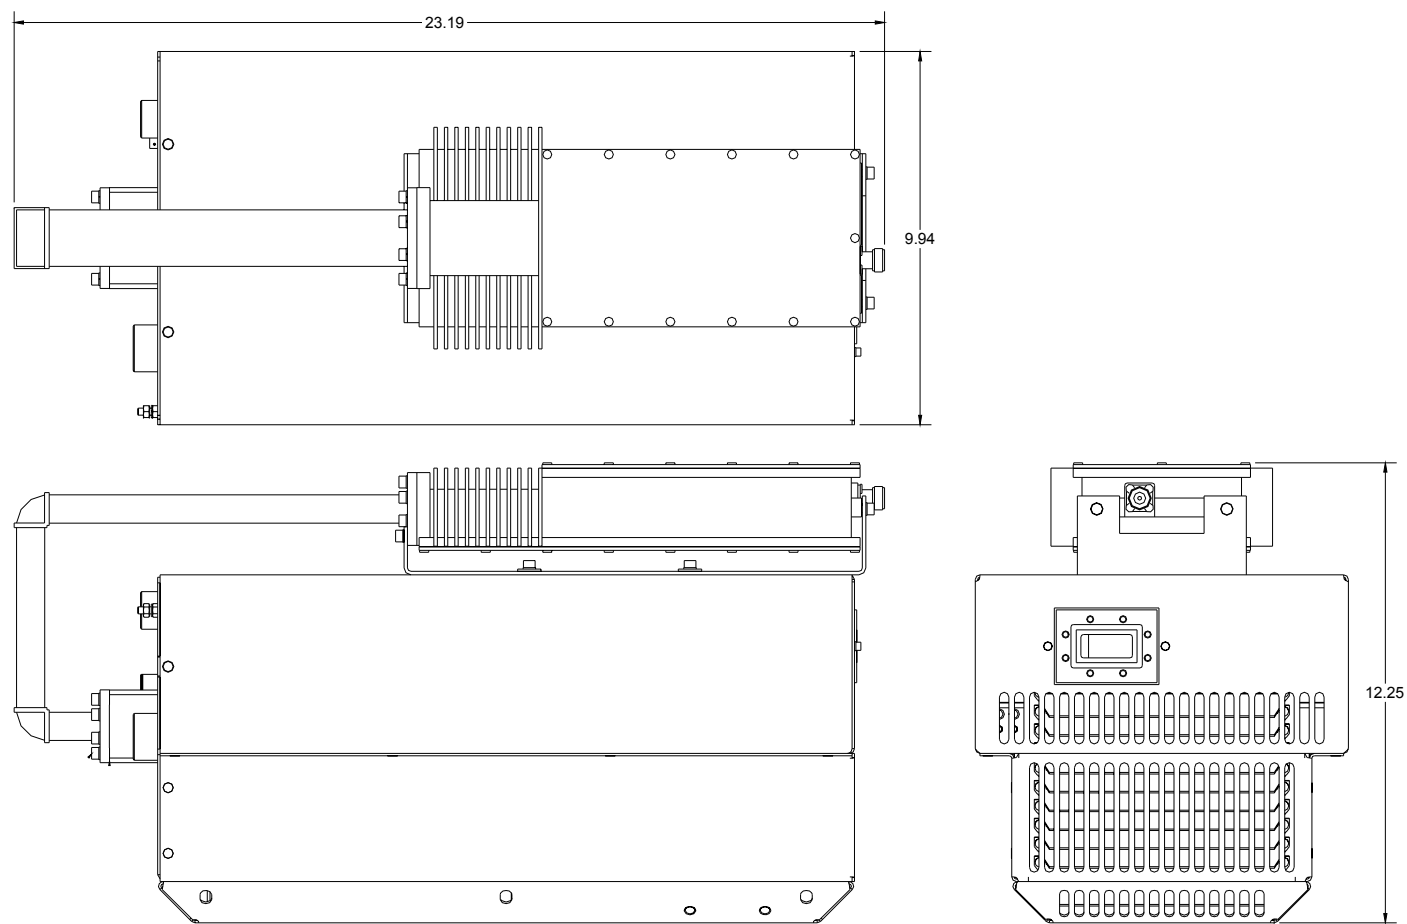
WTX-576450/51/52/53-70-ES-35 Outline Drawing
